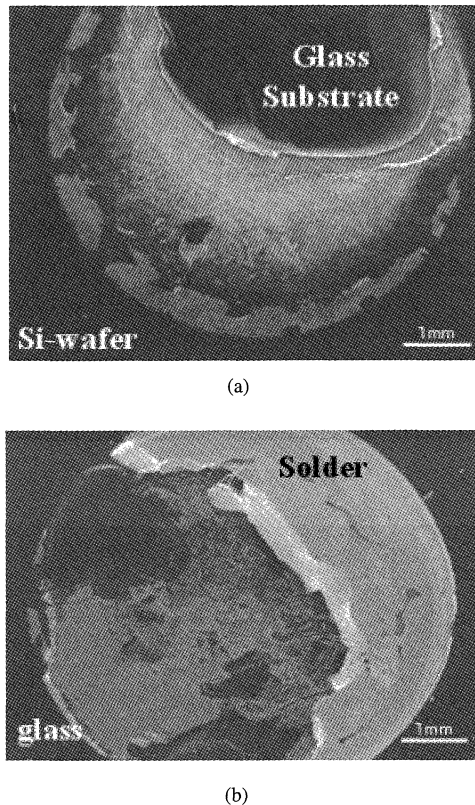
Fracture surface after tensile test for Si-wafer/solder/glass substrate joint. (a) Fracture surface after tensile test for Sn-37 mass%Pb solders plasma-cleaned at 500 W for 12 min (tensile strength: 9.4 MPa). (b) Fracture surface after tensile test for Sn-3.5 mass%Ag solder plasma-cleaned at 500 W for 8 min (tensile strength: 10.3 MPa).
